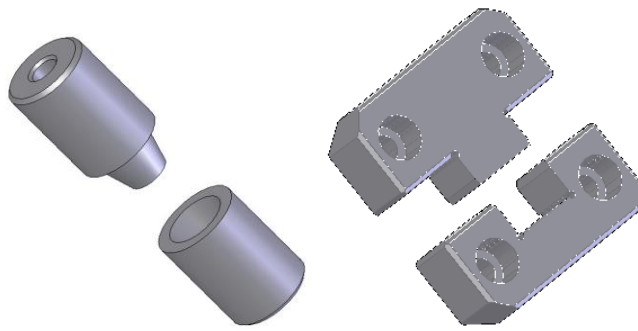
Tapered interlocks and Straight side interlocks.[11]
